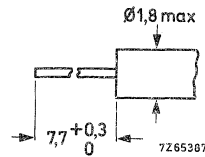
Wire diameter greater than 1 mm (max. 1,8 mm).
